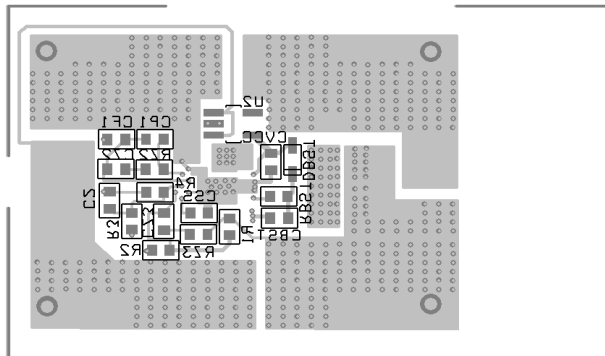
SP7651EB PC Layout Bottom Side & Component Placement
